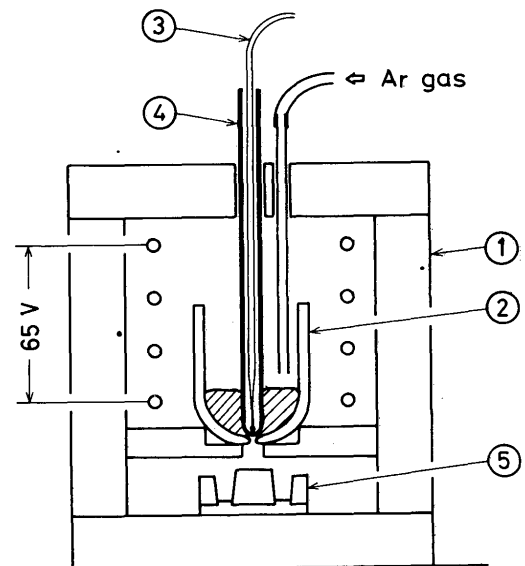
Equipment of ring-casting test. (1) electric furnace, (2) graphite crucible, (3) PR thermocouple, (4) stopper (protective tube for thermocouple), (5) mould.
